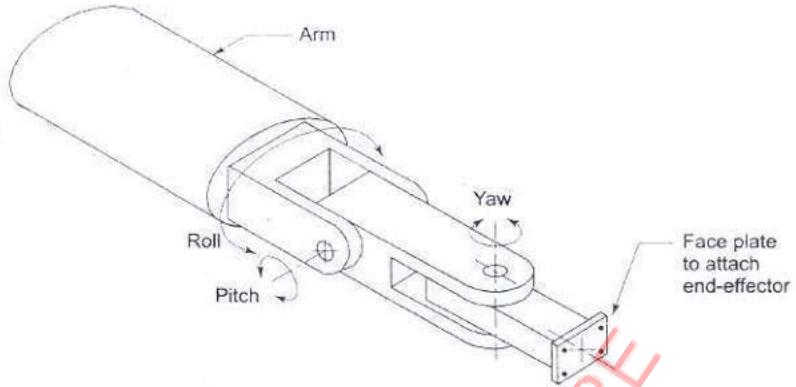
A 3-DOF RPY wrist with three revolute joints
